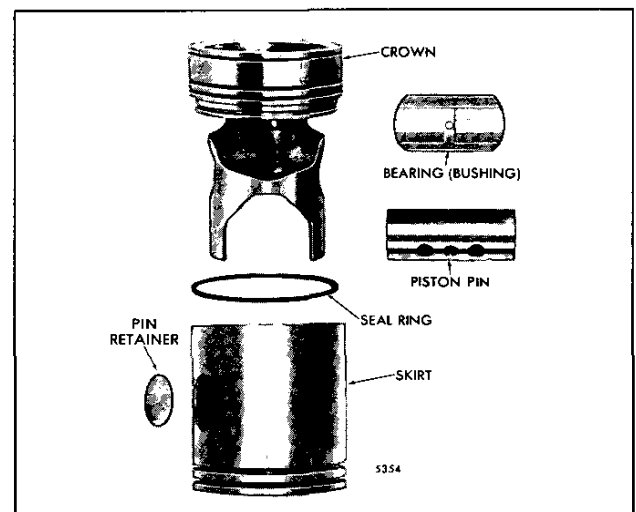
Cross-Head Piston and Connecting Rod Components
